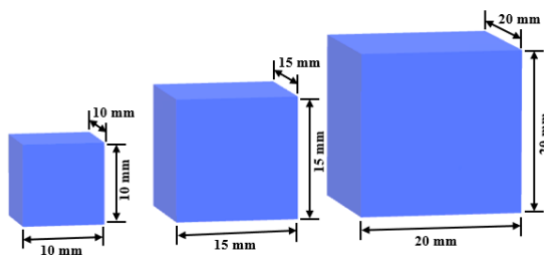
Three (3) ABS 3D-printed cube specimens with different dimensions
